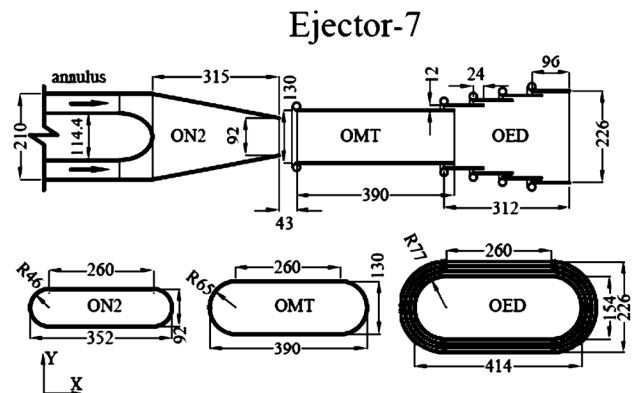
Dimensions (in mm) of Ejector 7 (E-7)
